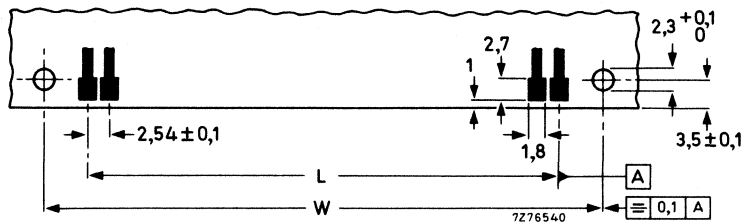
Recommended dimensions of the printed-wiring board to be fitted to the female part; see Table 5 for dimensions L and W.
